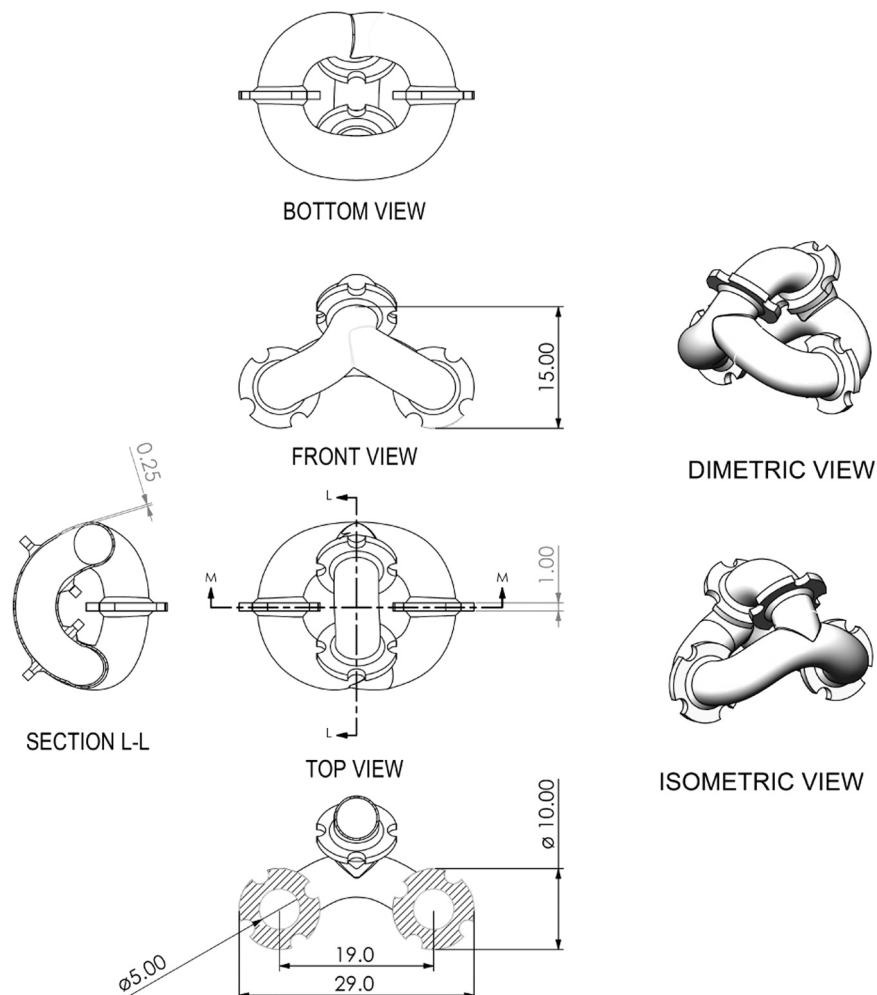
Dimensions of a m-MVN unit (dimensions in mm).
